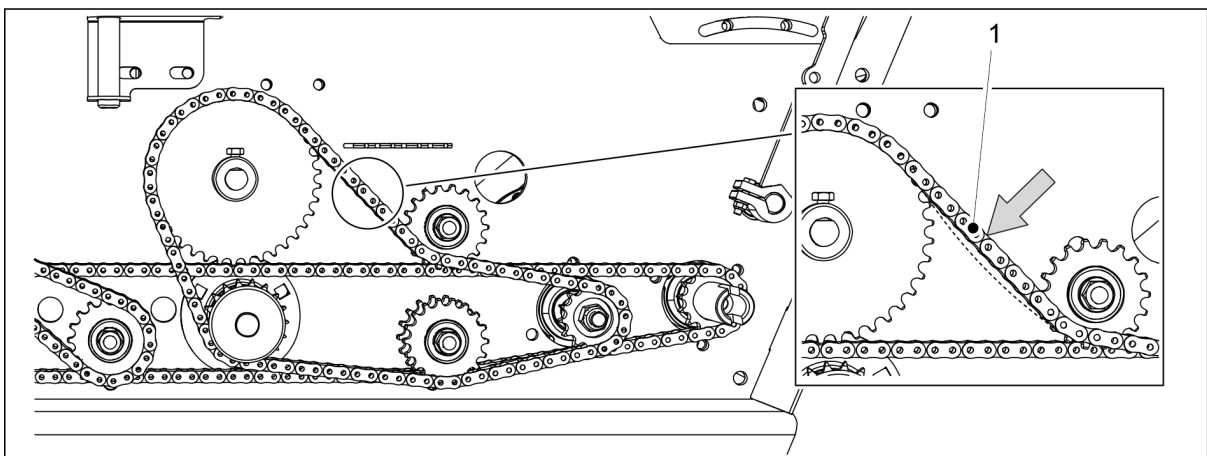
226. Checking chain tightness, seed dispersing axle transmission
